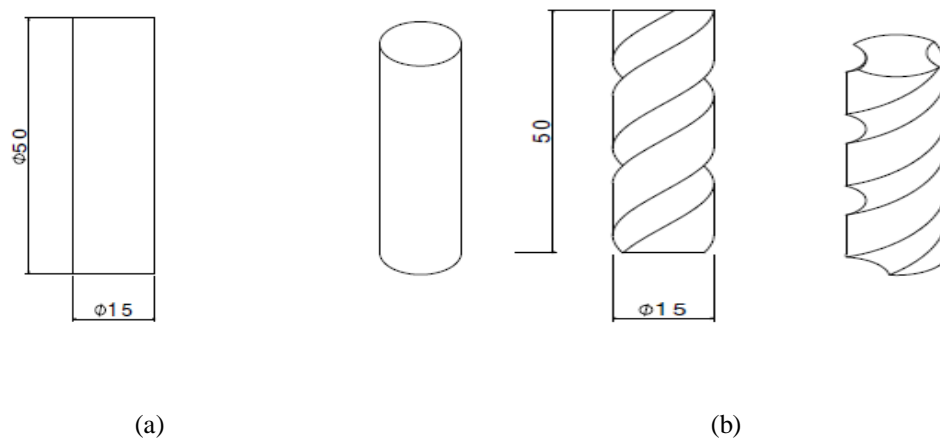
Geometry of pin fin (a) Cylindrical and (b) Helical grooved
